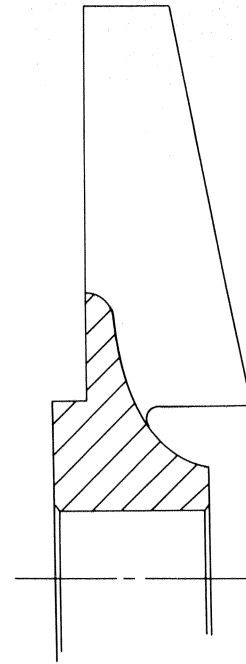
Impeller Cross-Section Used for all Phase I Impeller Tests.
